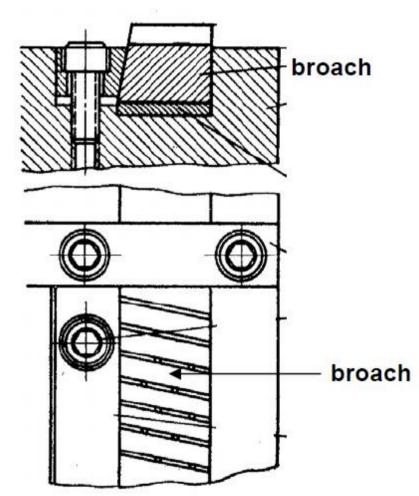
Mounting external broach for surfacing and slotting
